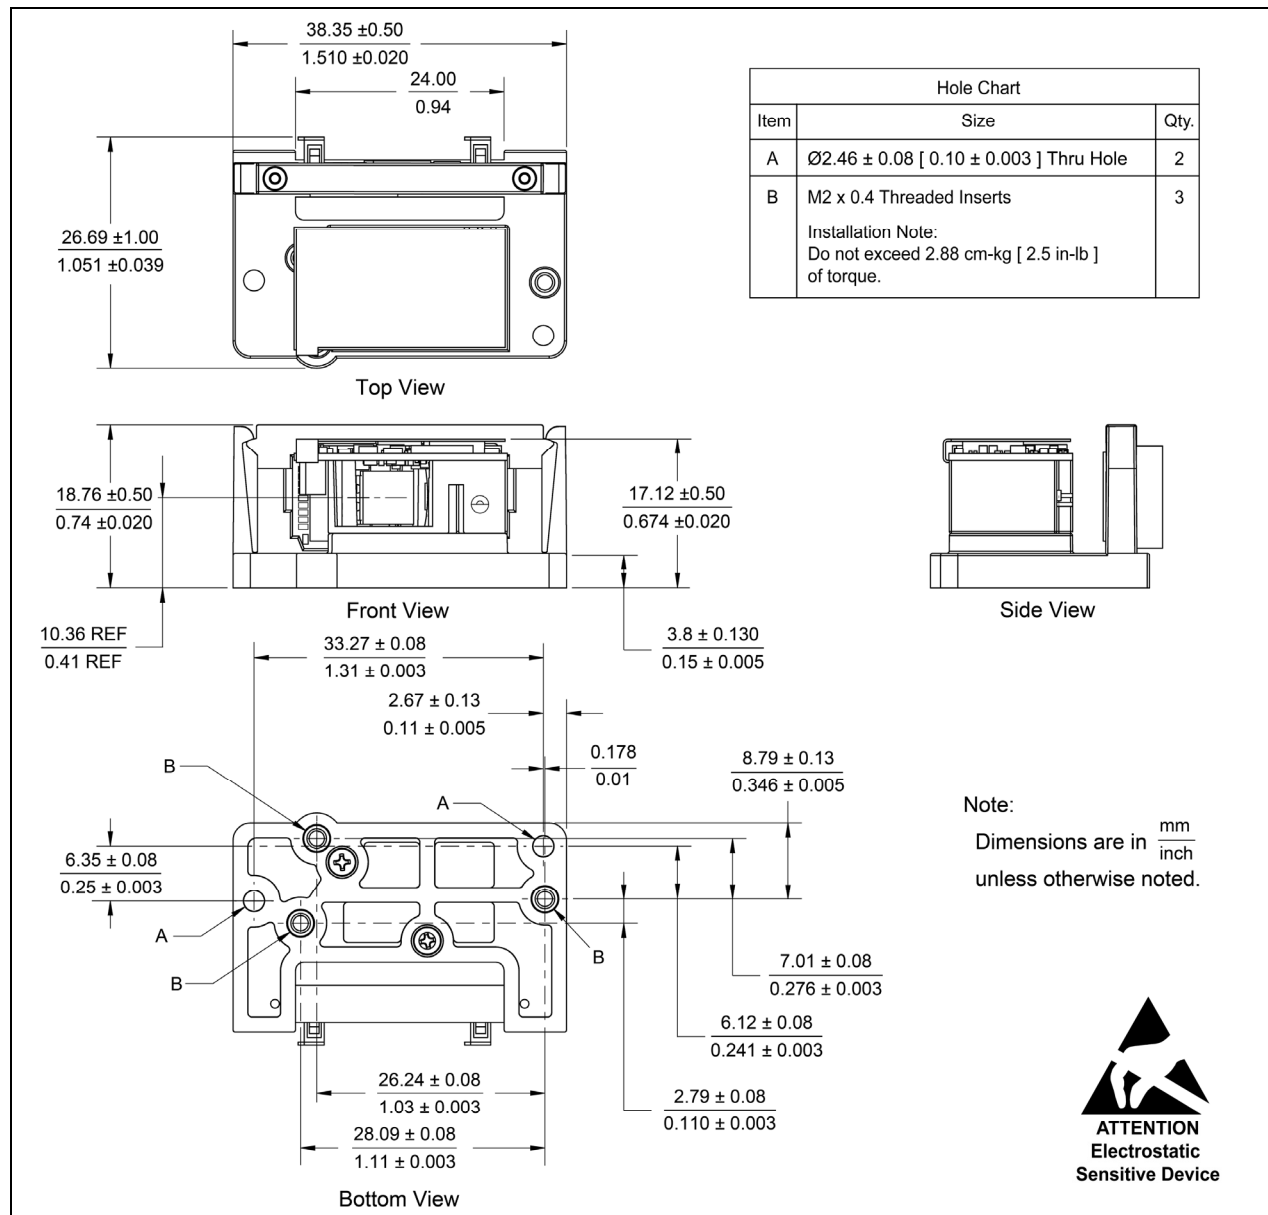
IS4823/IS4825 Bracketed (-1 and -2) Dimensions
